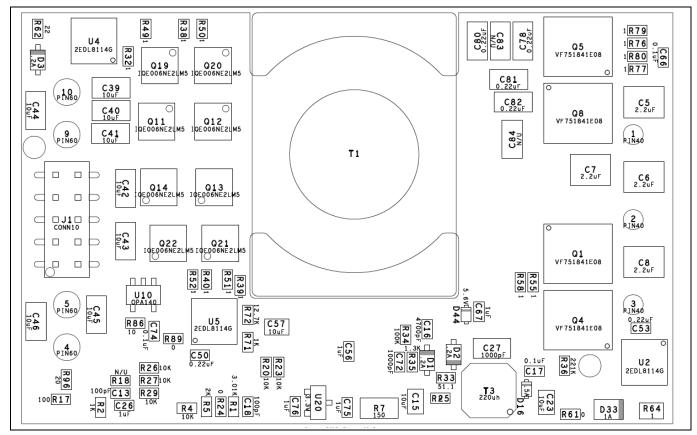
Assembly reference - bottom side of PCBApplication Note14 of 38
